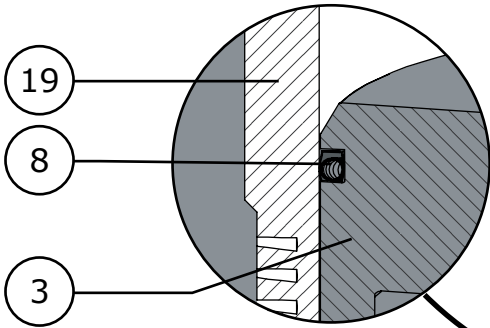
Load Ring Diagram (8 Inch Valve Assembly)
